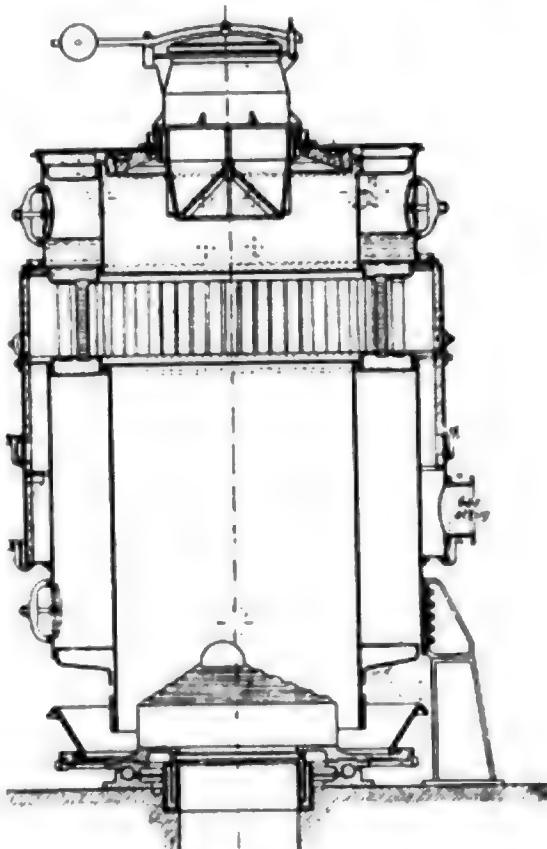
MARISCHKA COMBINED GAS PRODUCER AND STEAM BOILER.
